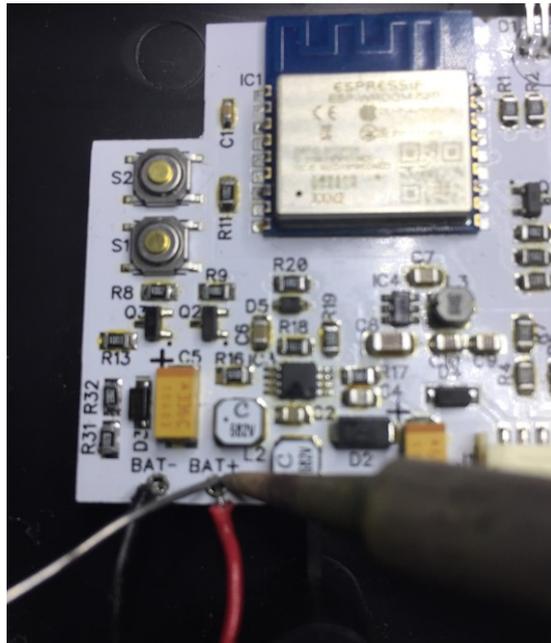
Solder the battery leads to the WNI-32 module. Some modules may have screw terminals to avoid soldering.
